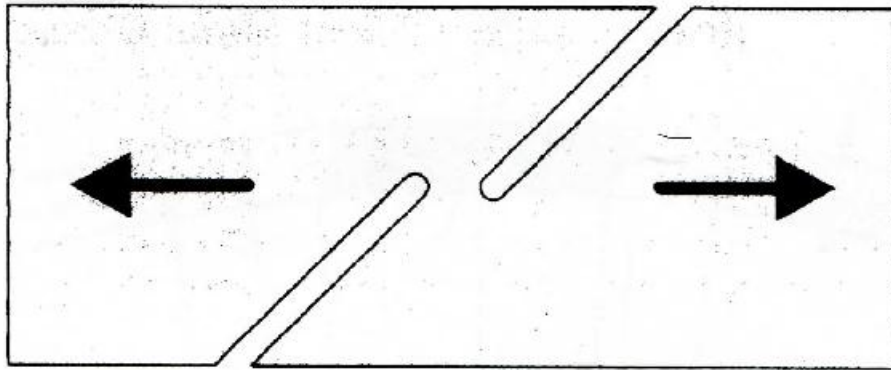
ASTM B831 shear test specimen for sheet materials [118]
